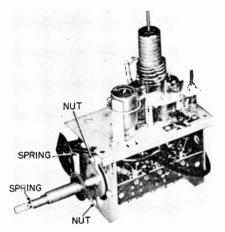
Photo of a tuner showing the springs and nuts that must be removed to install a new detent.
